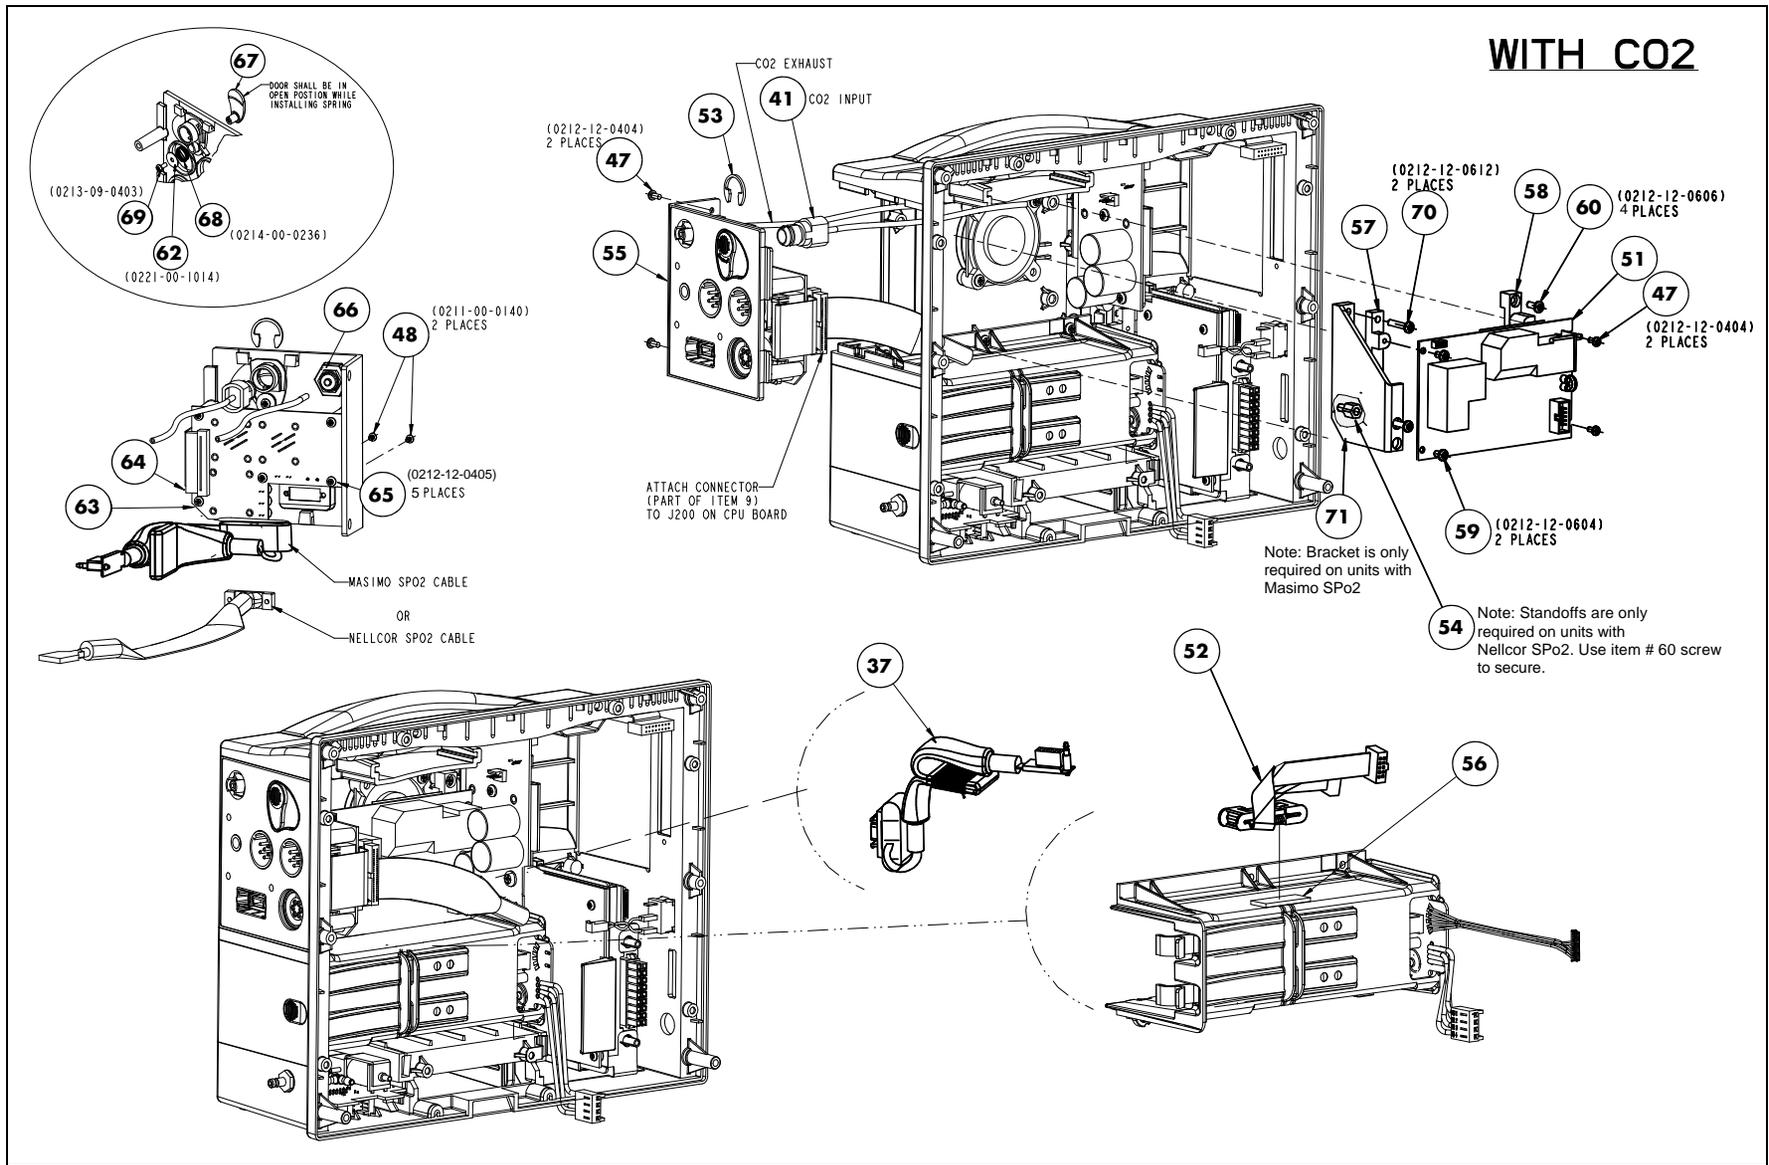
Rear Housing Assembly (Lithium-Ion battery configuration)
